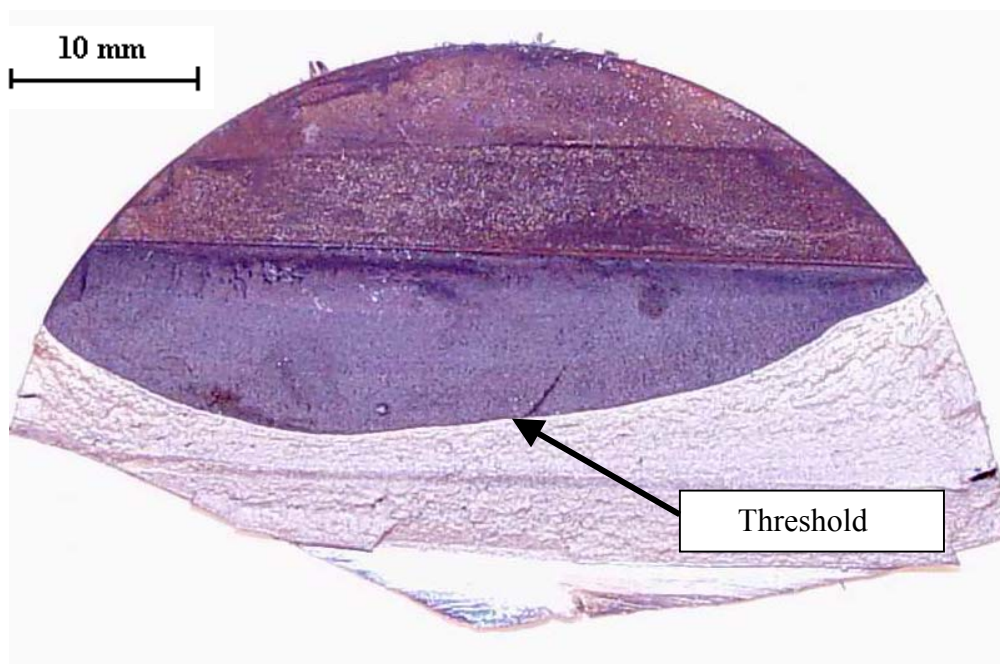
Fracture surface of the crack grown in steam at 160 °C
